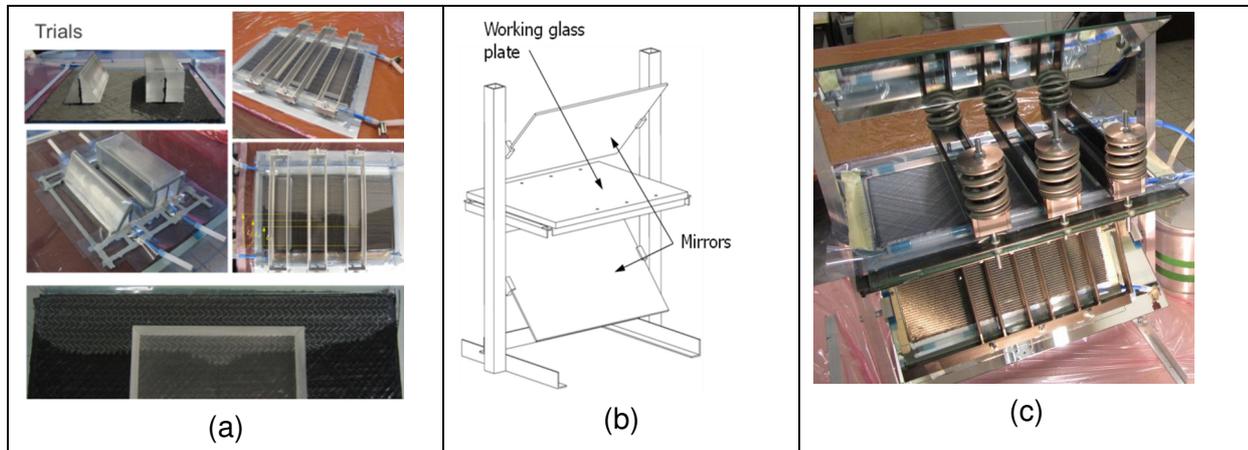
Infusion tests: Trials (a), schematic view of a test rig (b), test rig (c)
